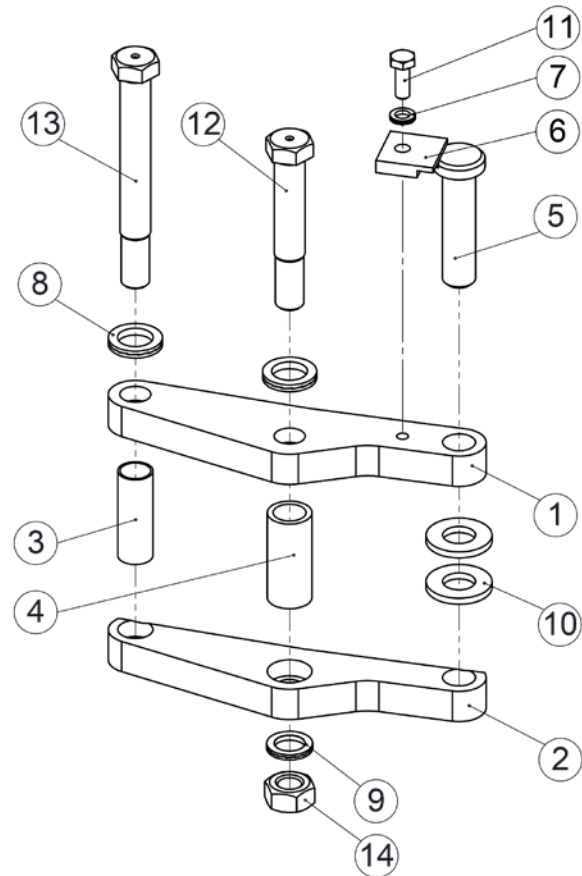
678155 Latch Mechanism Assembly for AMP®-750/1 and AMP®-1000/1
